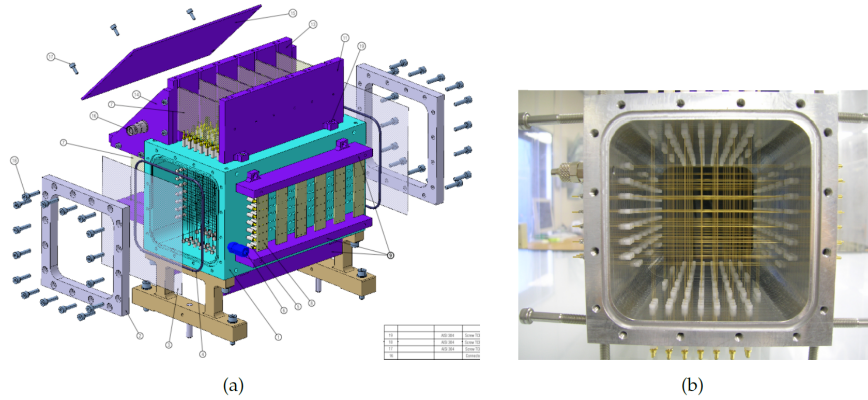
Technical drawing (a) and picture of the inside (b) of the BM.
